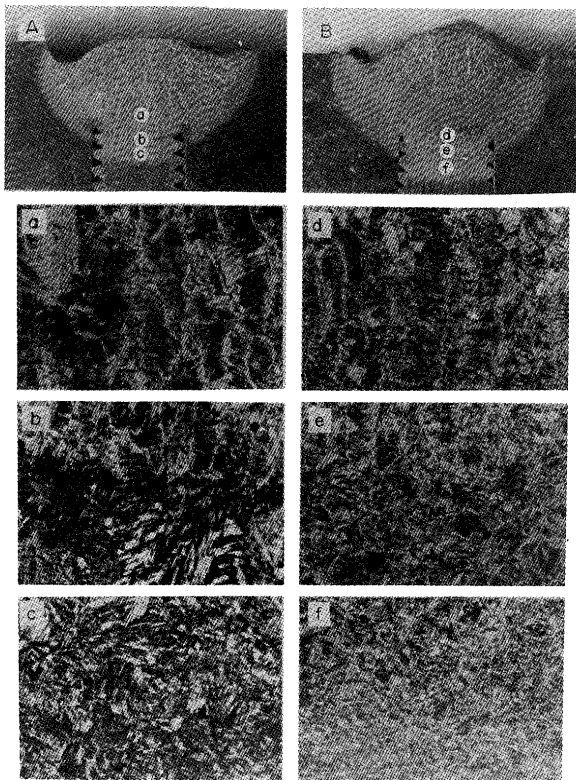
Macro and microstructures of weld zone (Underwater welding)
